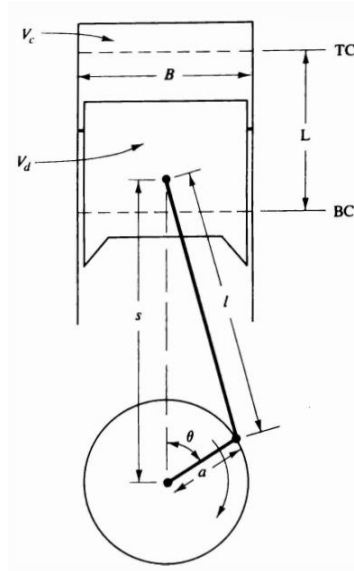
Geometry of a typical crank train. Reprinted from [2]
